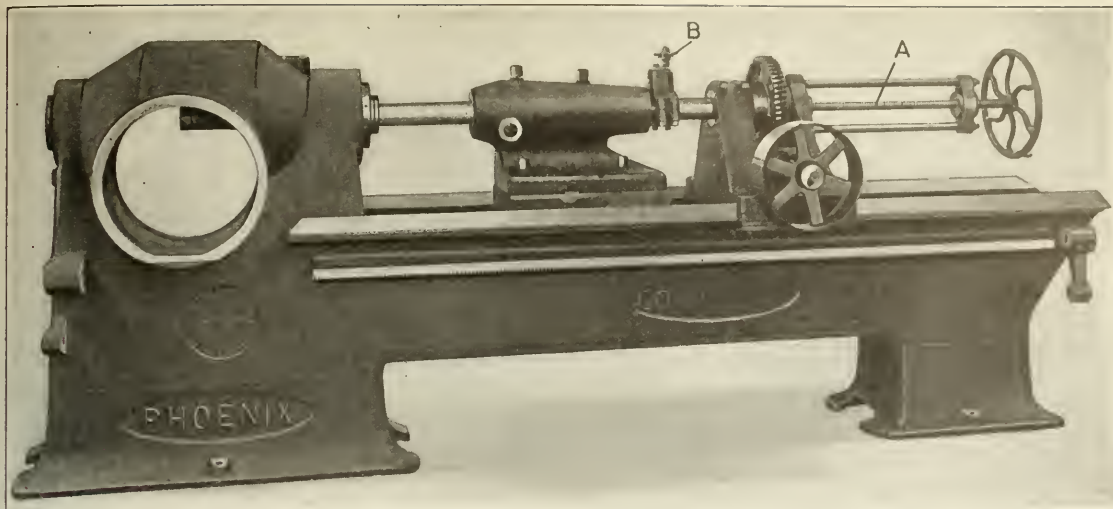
Equipment for boring and facing Tailstock Spindle Bearing—Illustration shows Performance of Facing Operation
